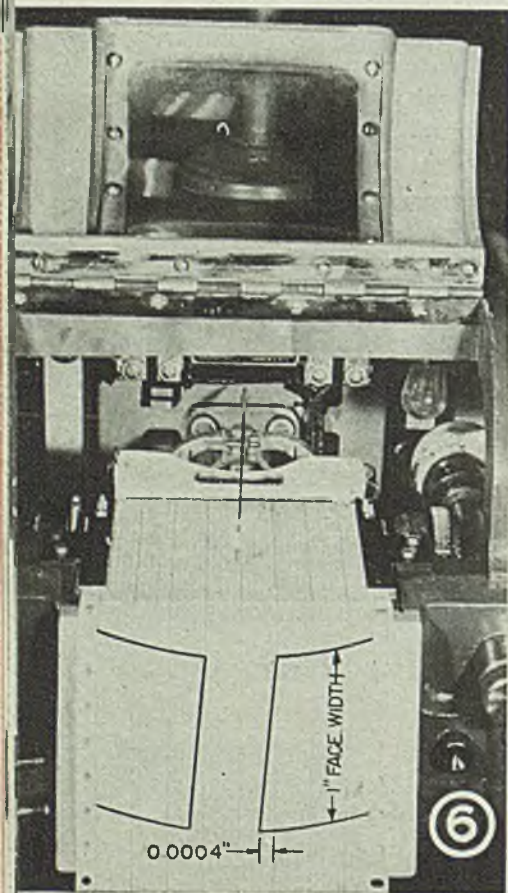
Electrical recorder shown here with chart of adjacent sides of right hand helical gear tooth indicating that gear has 0.0004-in. displacement in helix in the face width measured
